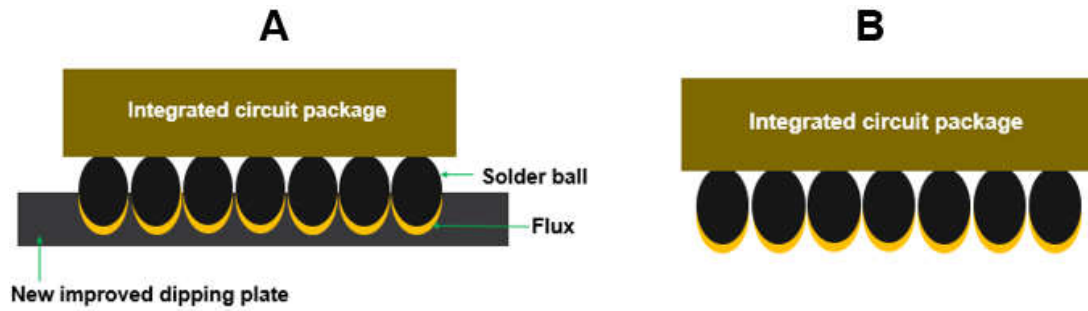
a) Modified dipping plate; b) Unit without flux shorting
